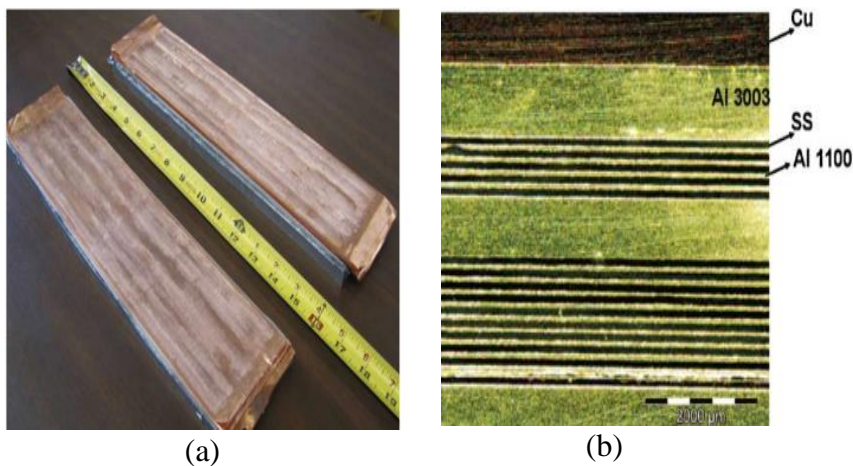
FGM component produced by UC machine (a) Frontal view of an FGM sample made using a UC machine and figure (b) Side view of the FGM sample (Kumar 2010).
